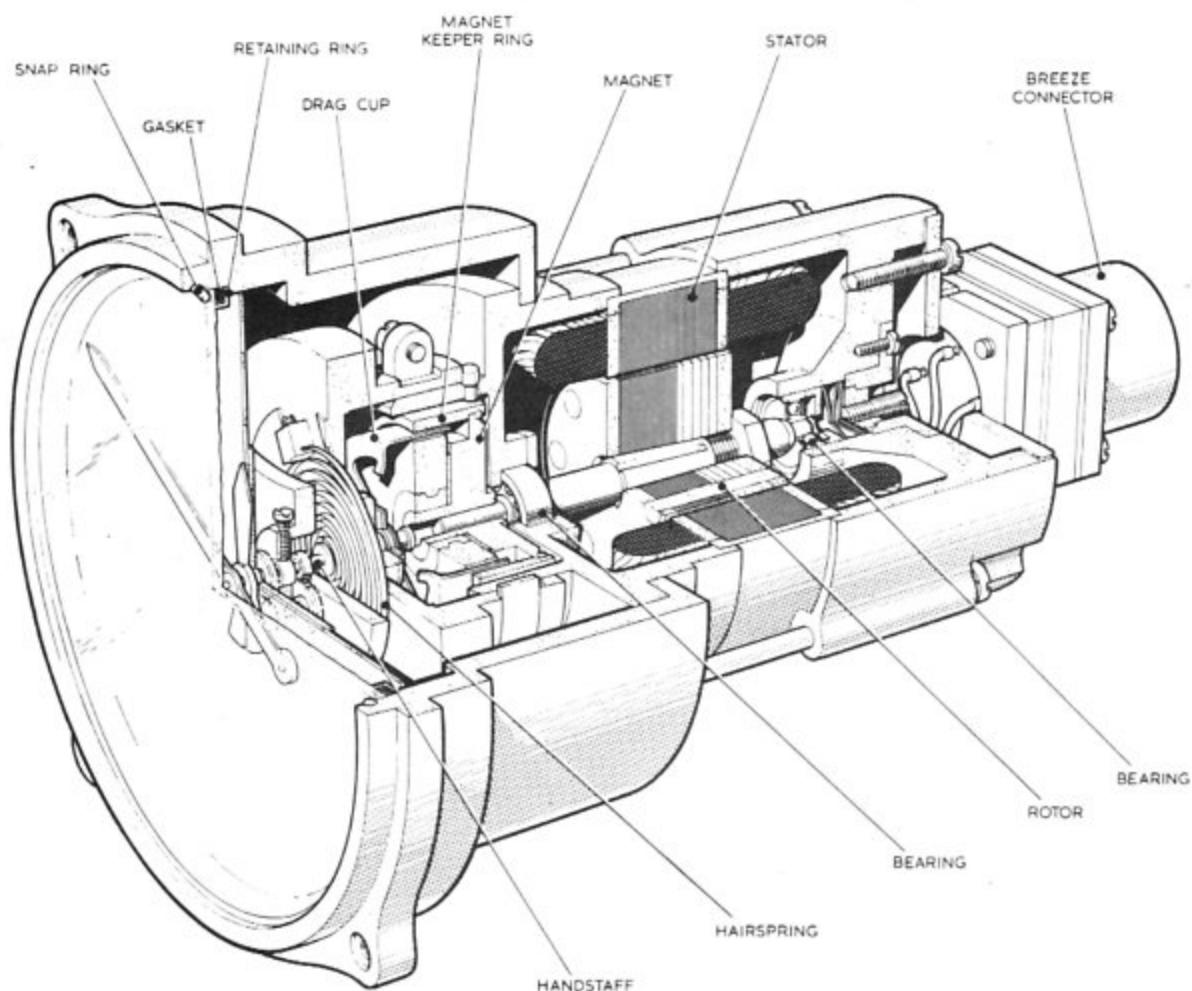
Tachometer indicator, Type KTD 1100 - cutaway view
